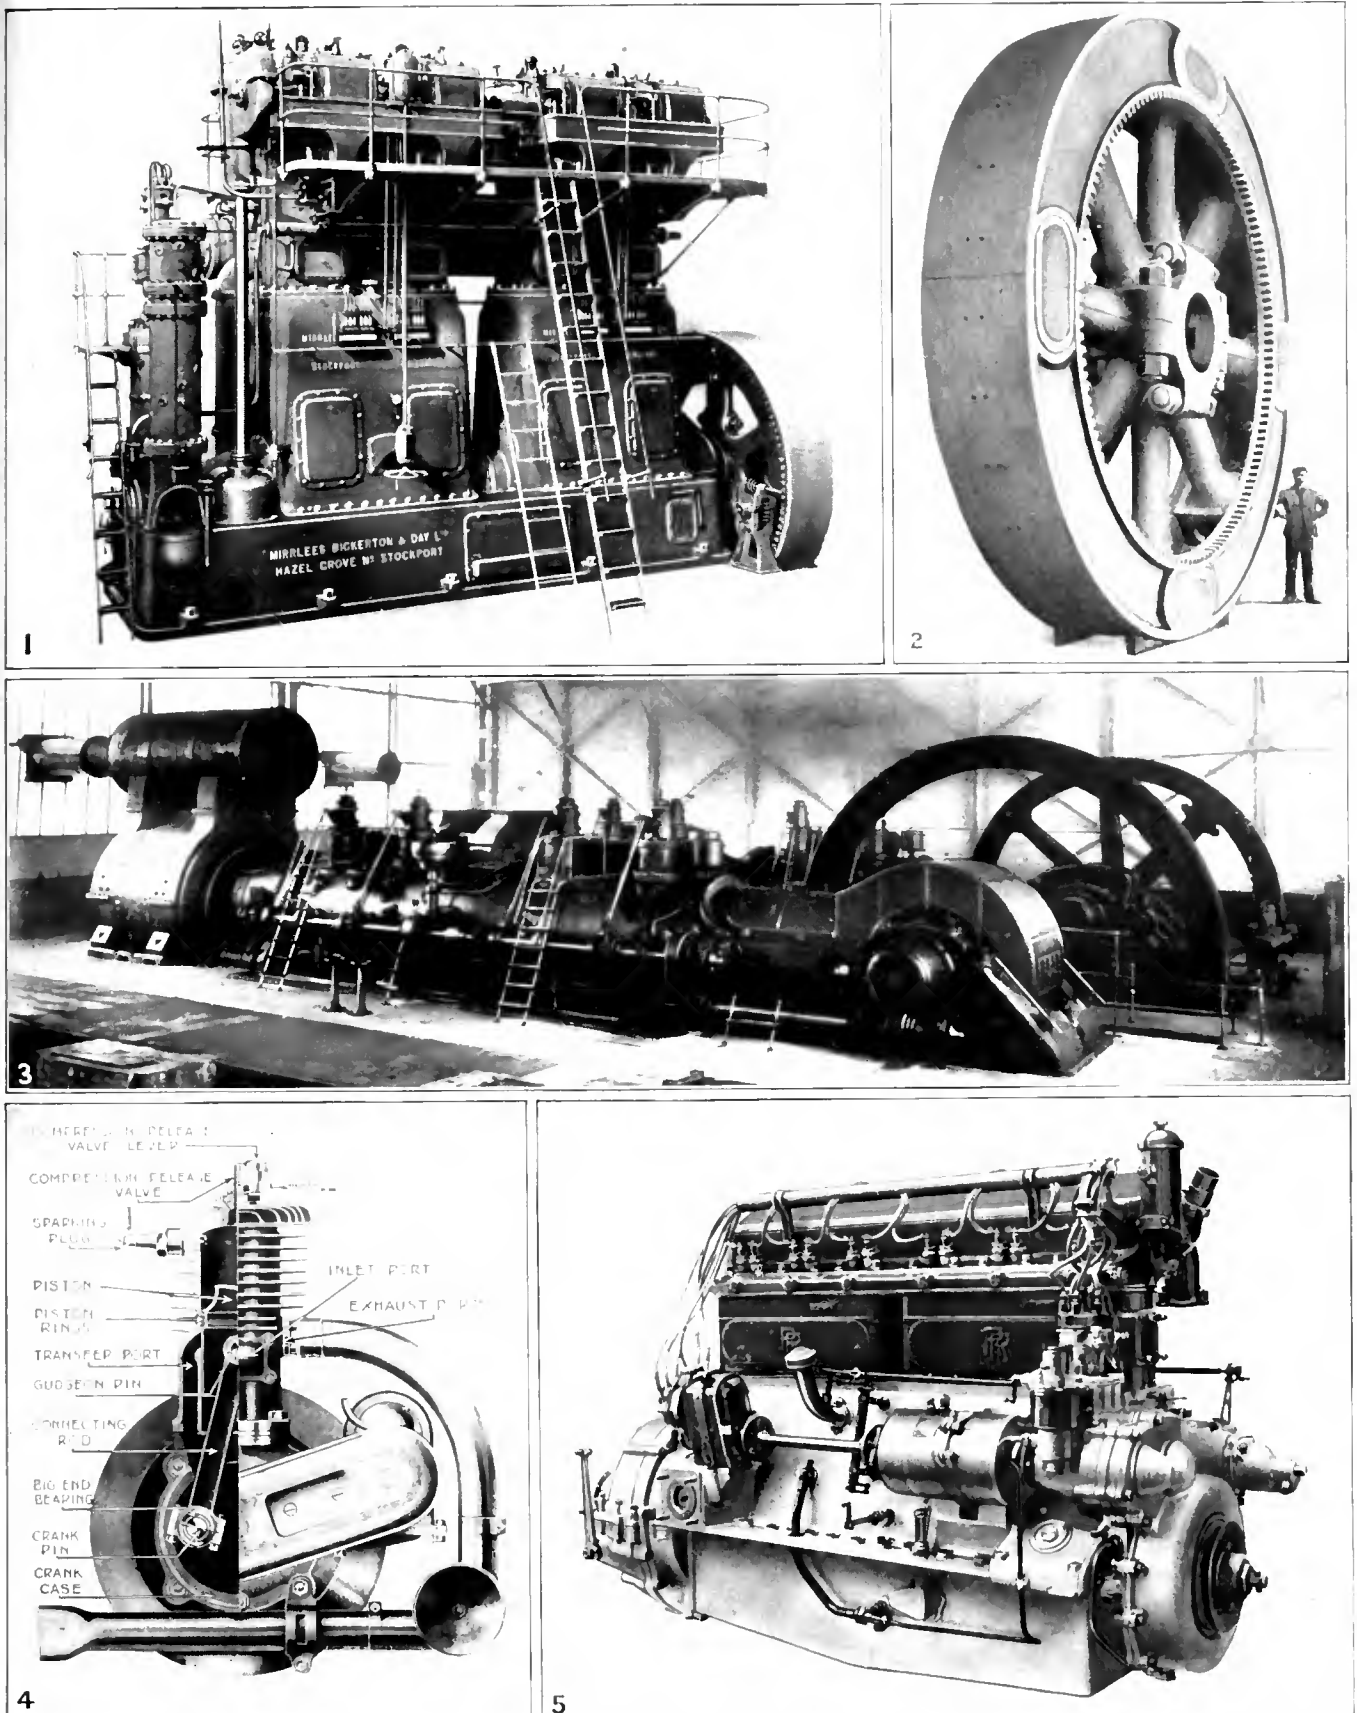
500 B.H.P. 4-cylinder Diesel engine. FIG. 2. Flywheel of 2,500 B.H.P. horizontal gas engine; approx. weight, 100 tons. FIG. 3. 3,000 B.H.P. Galloway twin-cylinder horizontal gas engine. FIG. 4. Part sectional view of modern air-cooled single-cylinder, two-stroke engine, with principal parts named. FIG. 5. Latest type Rolls-Royce 40-50 H.P. car engine.
